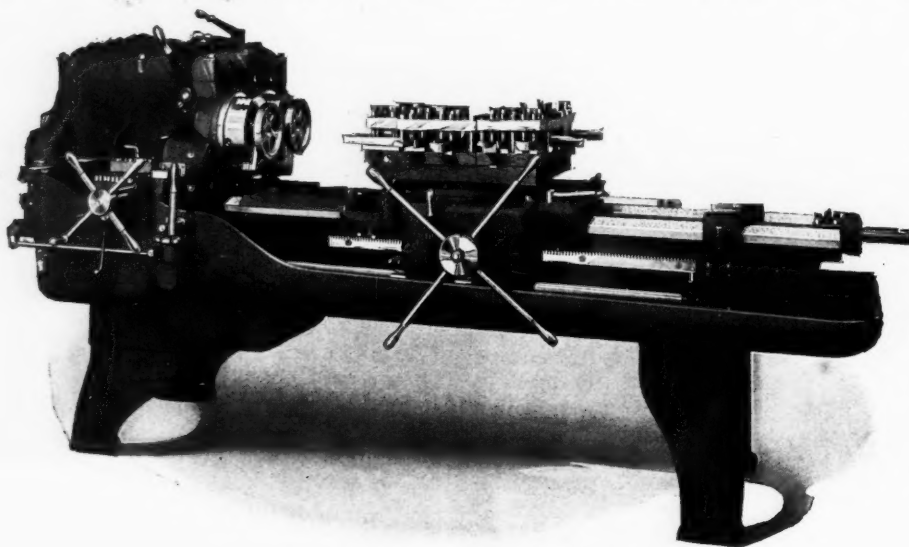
Jones & Lamson Double-spindle Flat Turret Lathe
